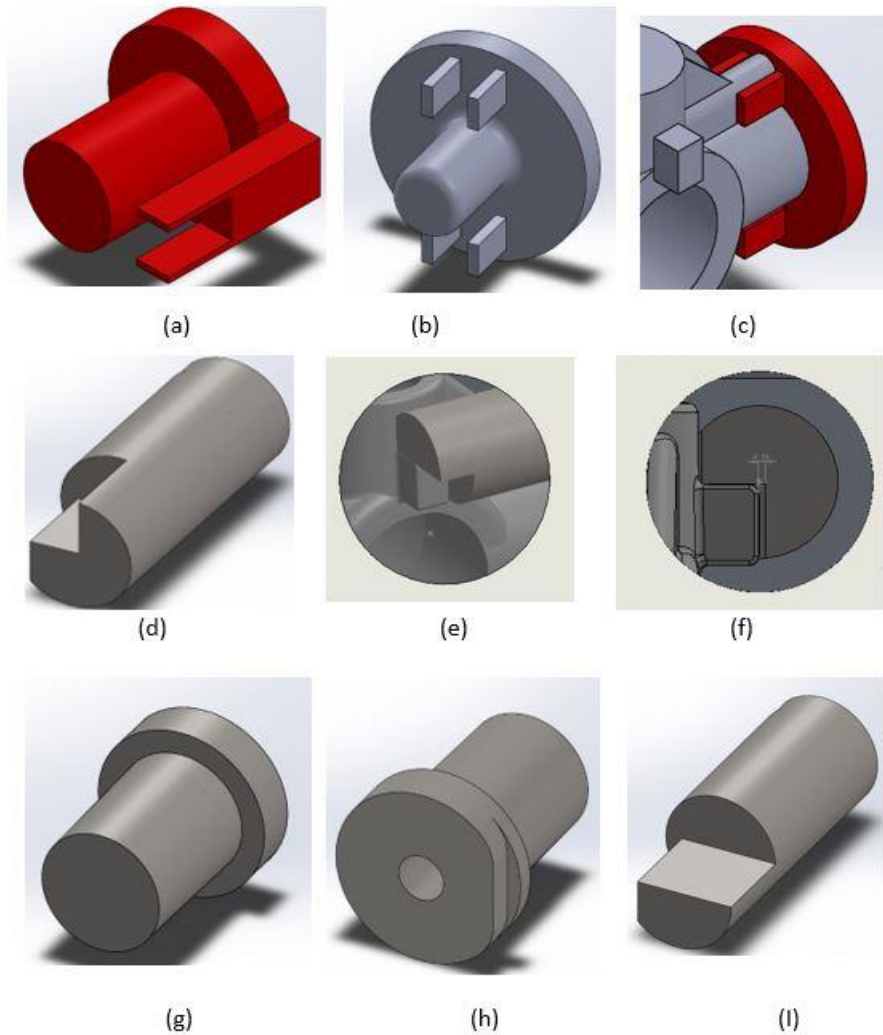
(a) First design iteration (b) & (c) 2-Holding spot pins (d), (e) & (f) Support pin iteration curving around the runner cut out points (g) Holding pin front view (h) Back view showing the cut out spaces for locking the pins on to the main plate (i) Final design of the support pin.
